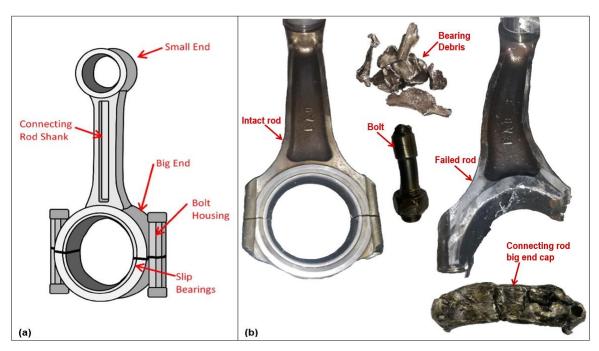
(a) For reference, the key parts of a generic connecting rod assembly; (b) the intact No.5 connecting rod and the failed No.6 connecting rod with failed components.
